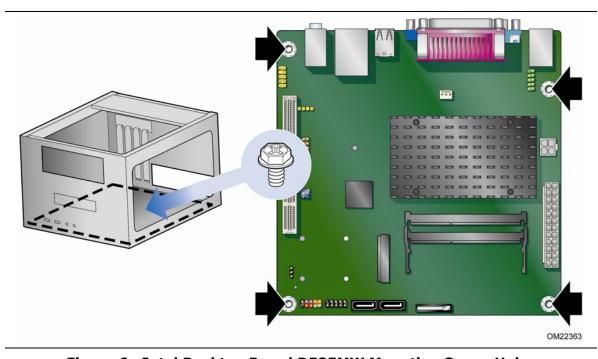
Intel Desktop Board D525MW Mounting Screw Holes
